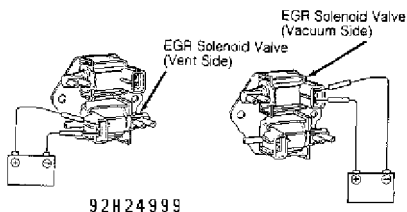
Testing EGR Solenoid Valves (MX-3 DOHC Shown; MX-6 2.5L, 626 2.5L & 929 Similar)
